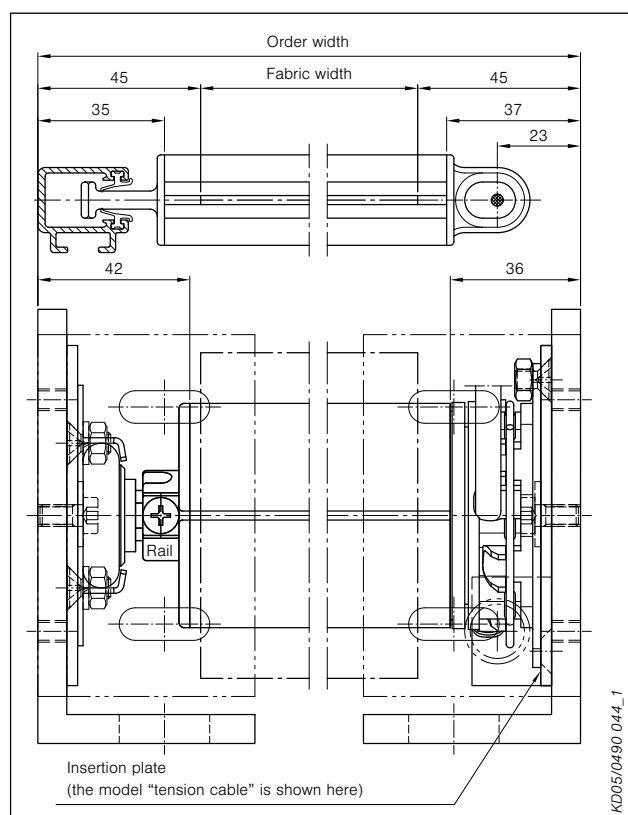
Vertical awning 491 with motor, cable or rail guidance, motor end bearing situation
